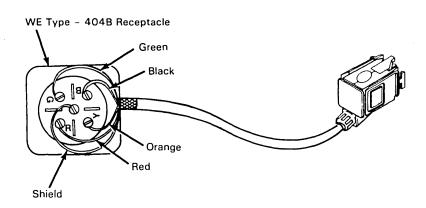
Testing the Store Loop Attachment Assembly with Ohmmeter
